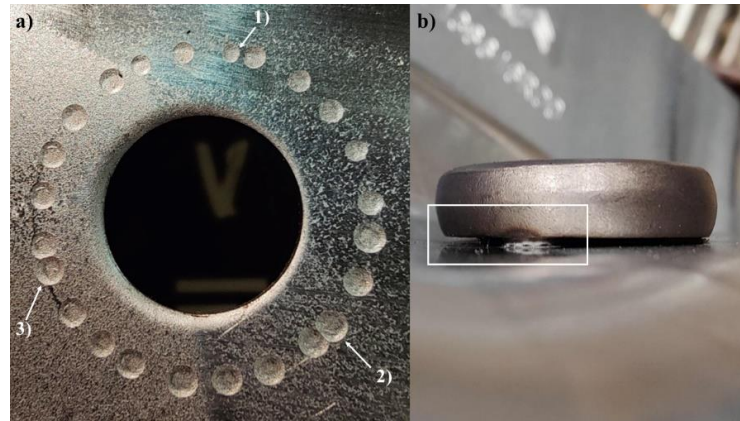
a) Plate marks resulted from the pressing of the bolt in different positions with welding force; b) Bolt welded in the critical position,
